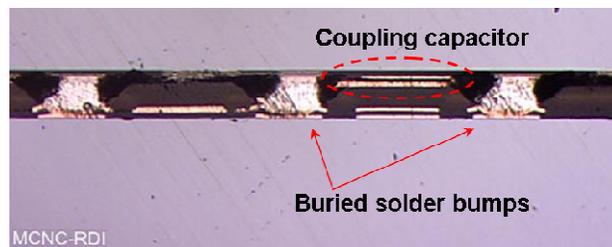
Cross-section view for chip-substrate interfaces in a MCM
